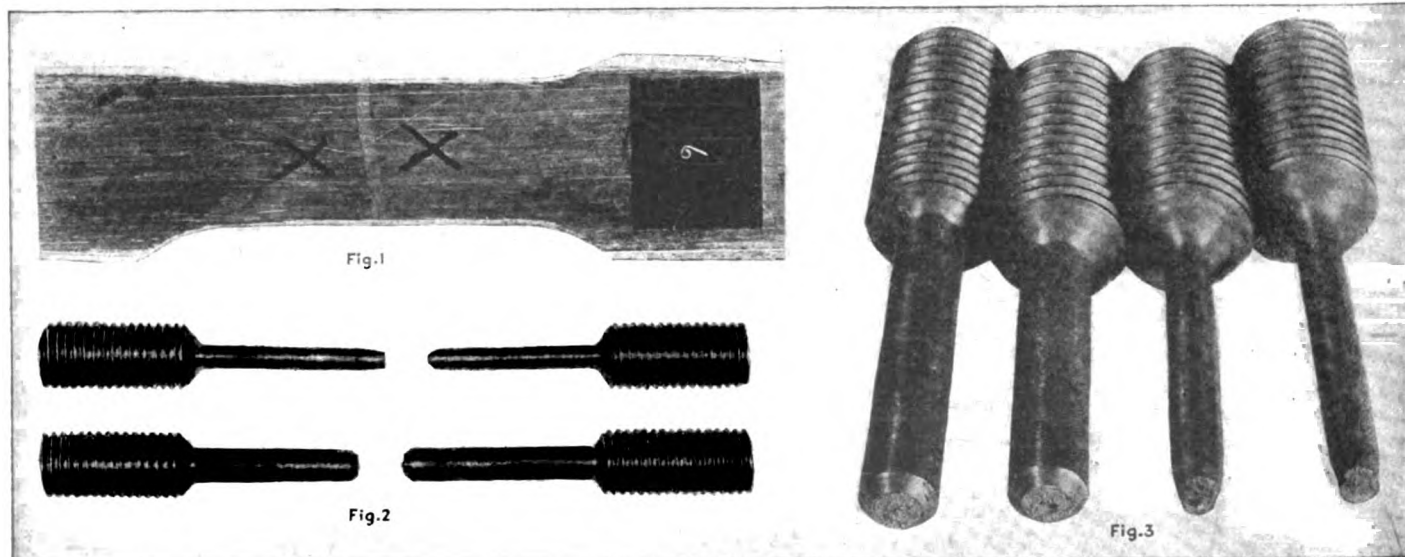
Fatigue specimen of sheet metal, enlarged about 2 diameters, showing flaws between marks X-X. Fig. 2—Nickel steel tensile specimens after rupture. Fig. 3—Nickel steel specimens, showing fracture (enlarged about 2 diameters), and absence of necking in notched specimen
